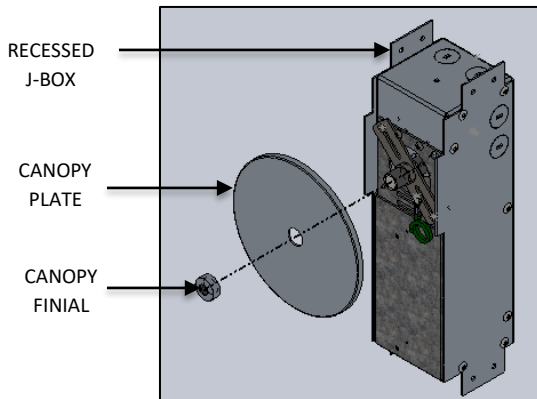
FINIAL AND CANOPY DISASSEMBLY
